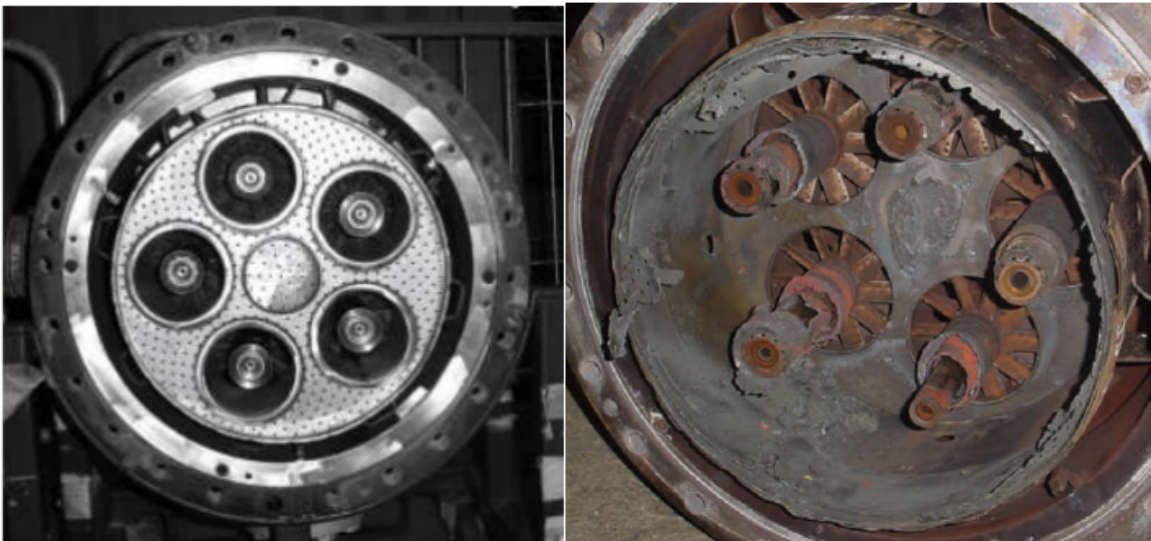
(a) New burner nozzle assembly before exposed to combustion instability. (b) Failed burner assembly after combustion instability [2].
